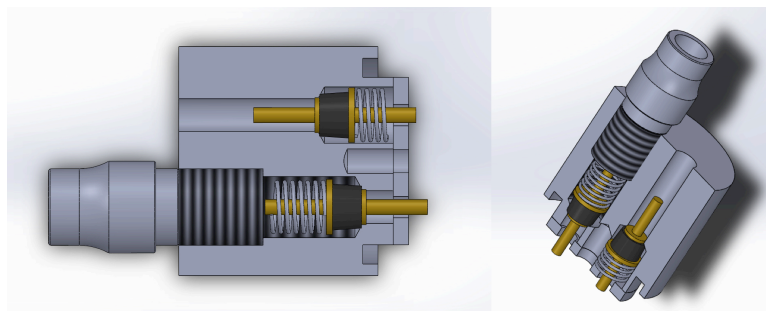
CAD model of the compressor head. The image shows a longitudinal cut of the head. It can be seen the sealing element taken from the Presta valve as well as the preload springs.
